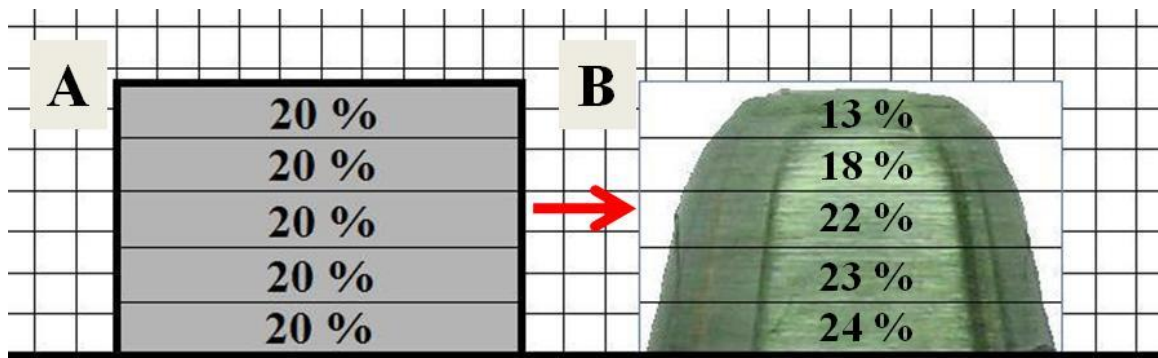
Non-Uniform Tool Wear Model; A) Original Probe Depiction, B) Probe after 24 inches of weld
